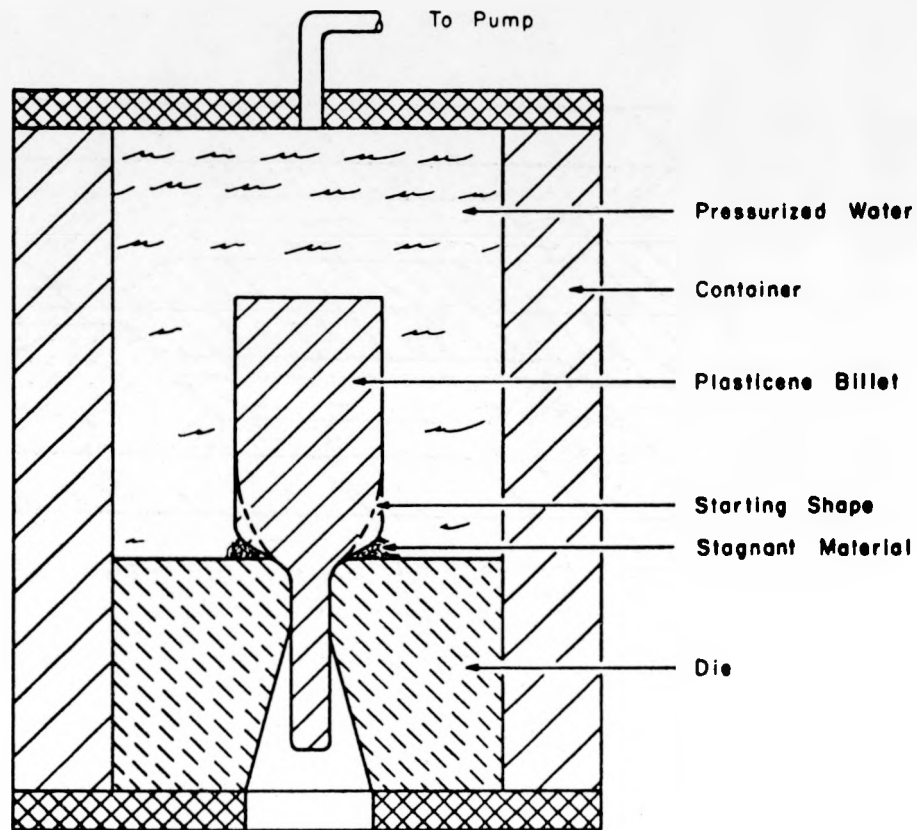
Sketch showing behavior of plasticene billet when extruded through a flat-faced die. Dotted line indicates conical shape on front of billet at start of extrusion.
